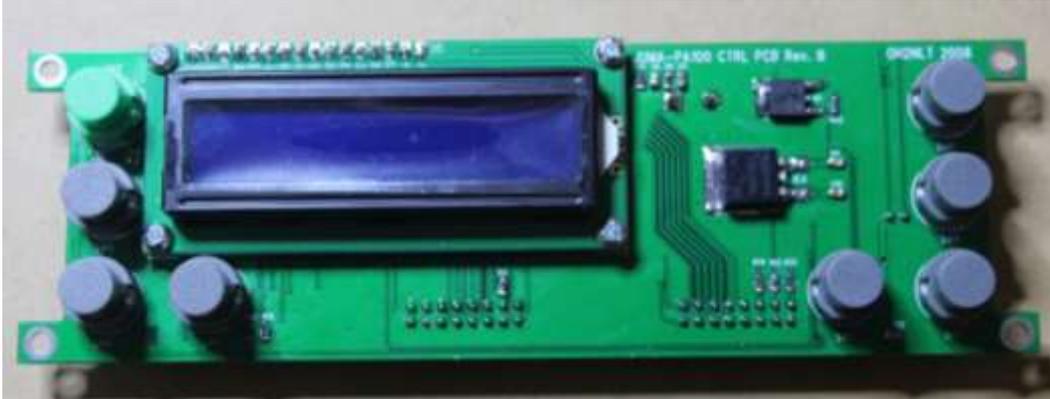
Digital Control Board – Front View with pushbuttons in place but not soldered.
